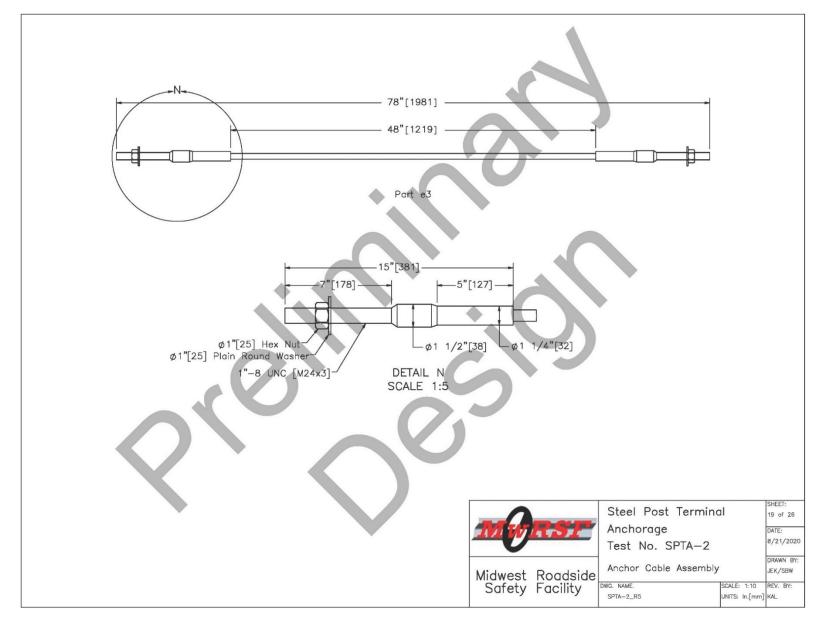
Anchor Cable Assembly, Test No. SPTA-2
